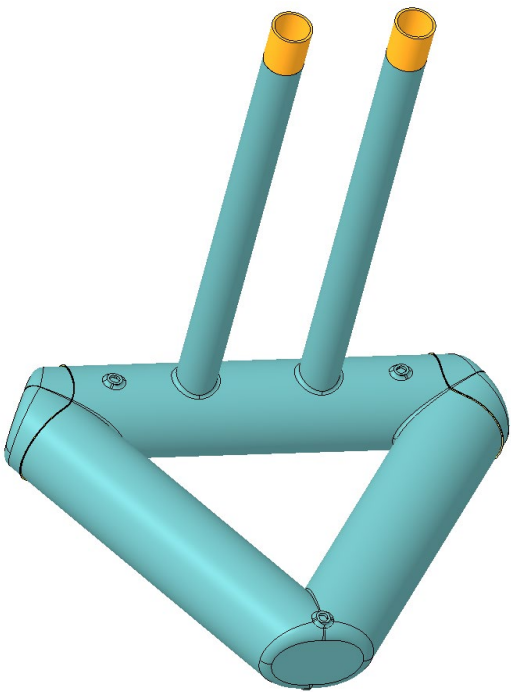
Tube Hydrogen Vessel Welded with 2 welds joining caps to body. Welds are designed to be electron beam welded in 2 passes. Each pass is a  $\frac{1}{2}$  rotational tube weld followed by a translation to join to the other  $\frac{1}{2}$  tube weld.
